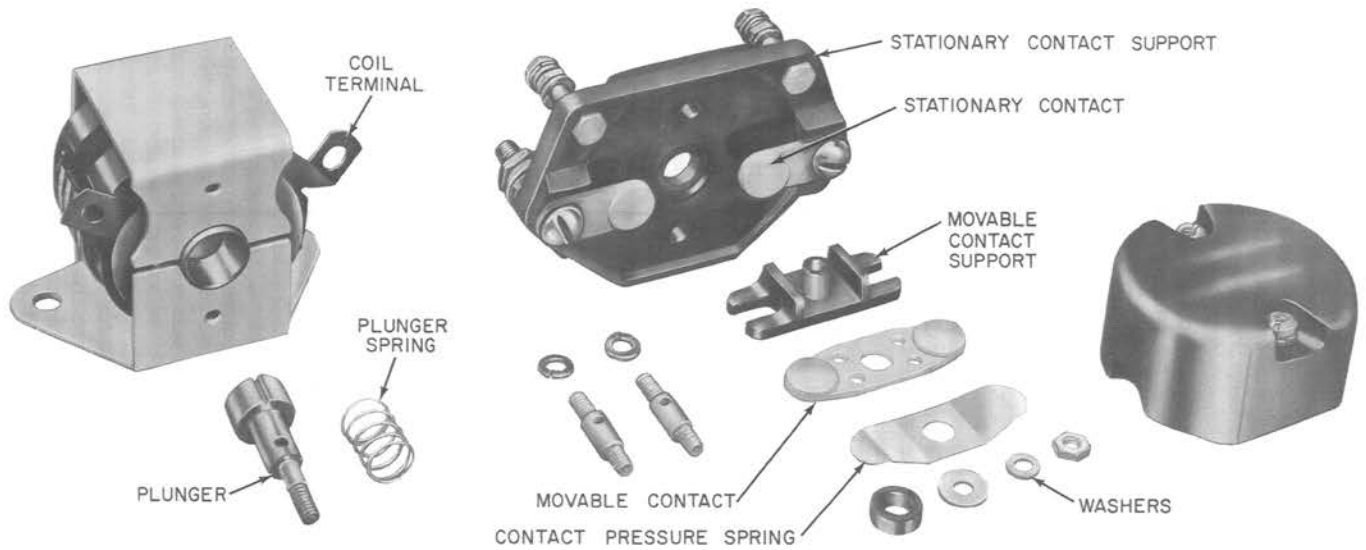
Single-Pole, 50-Ampere Contactor—Exploded View
